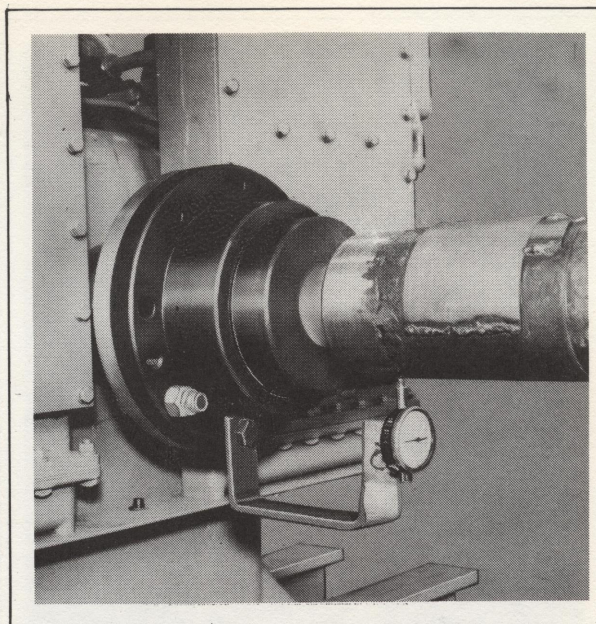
CHECKING ALIGNMENT BETWEEN DRIVESHAFT AND COMPRESSOR.
